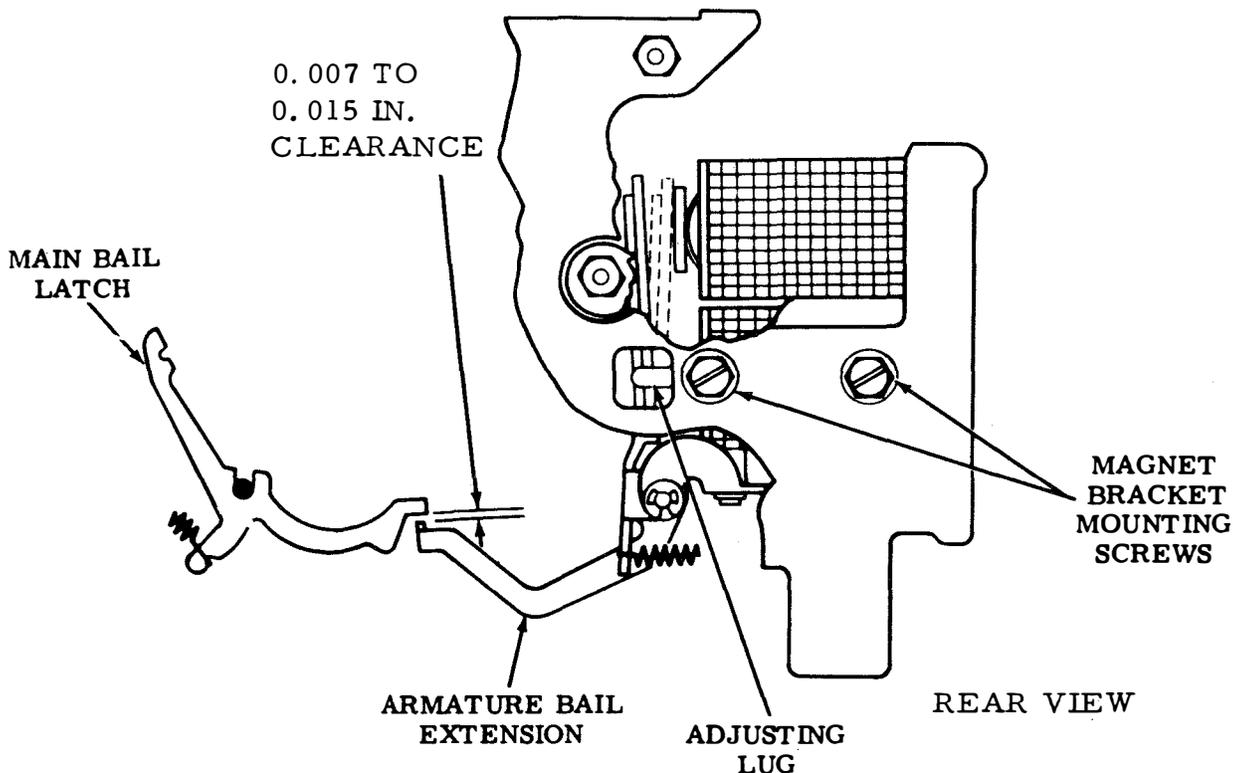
Clutch Magnet Assembly (Preliminary) (Main Bail Clearance)
